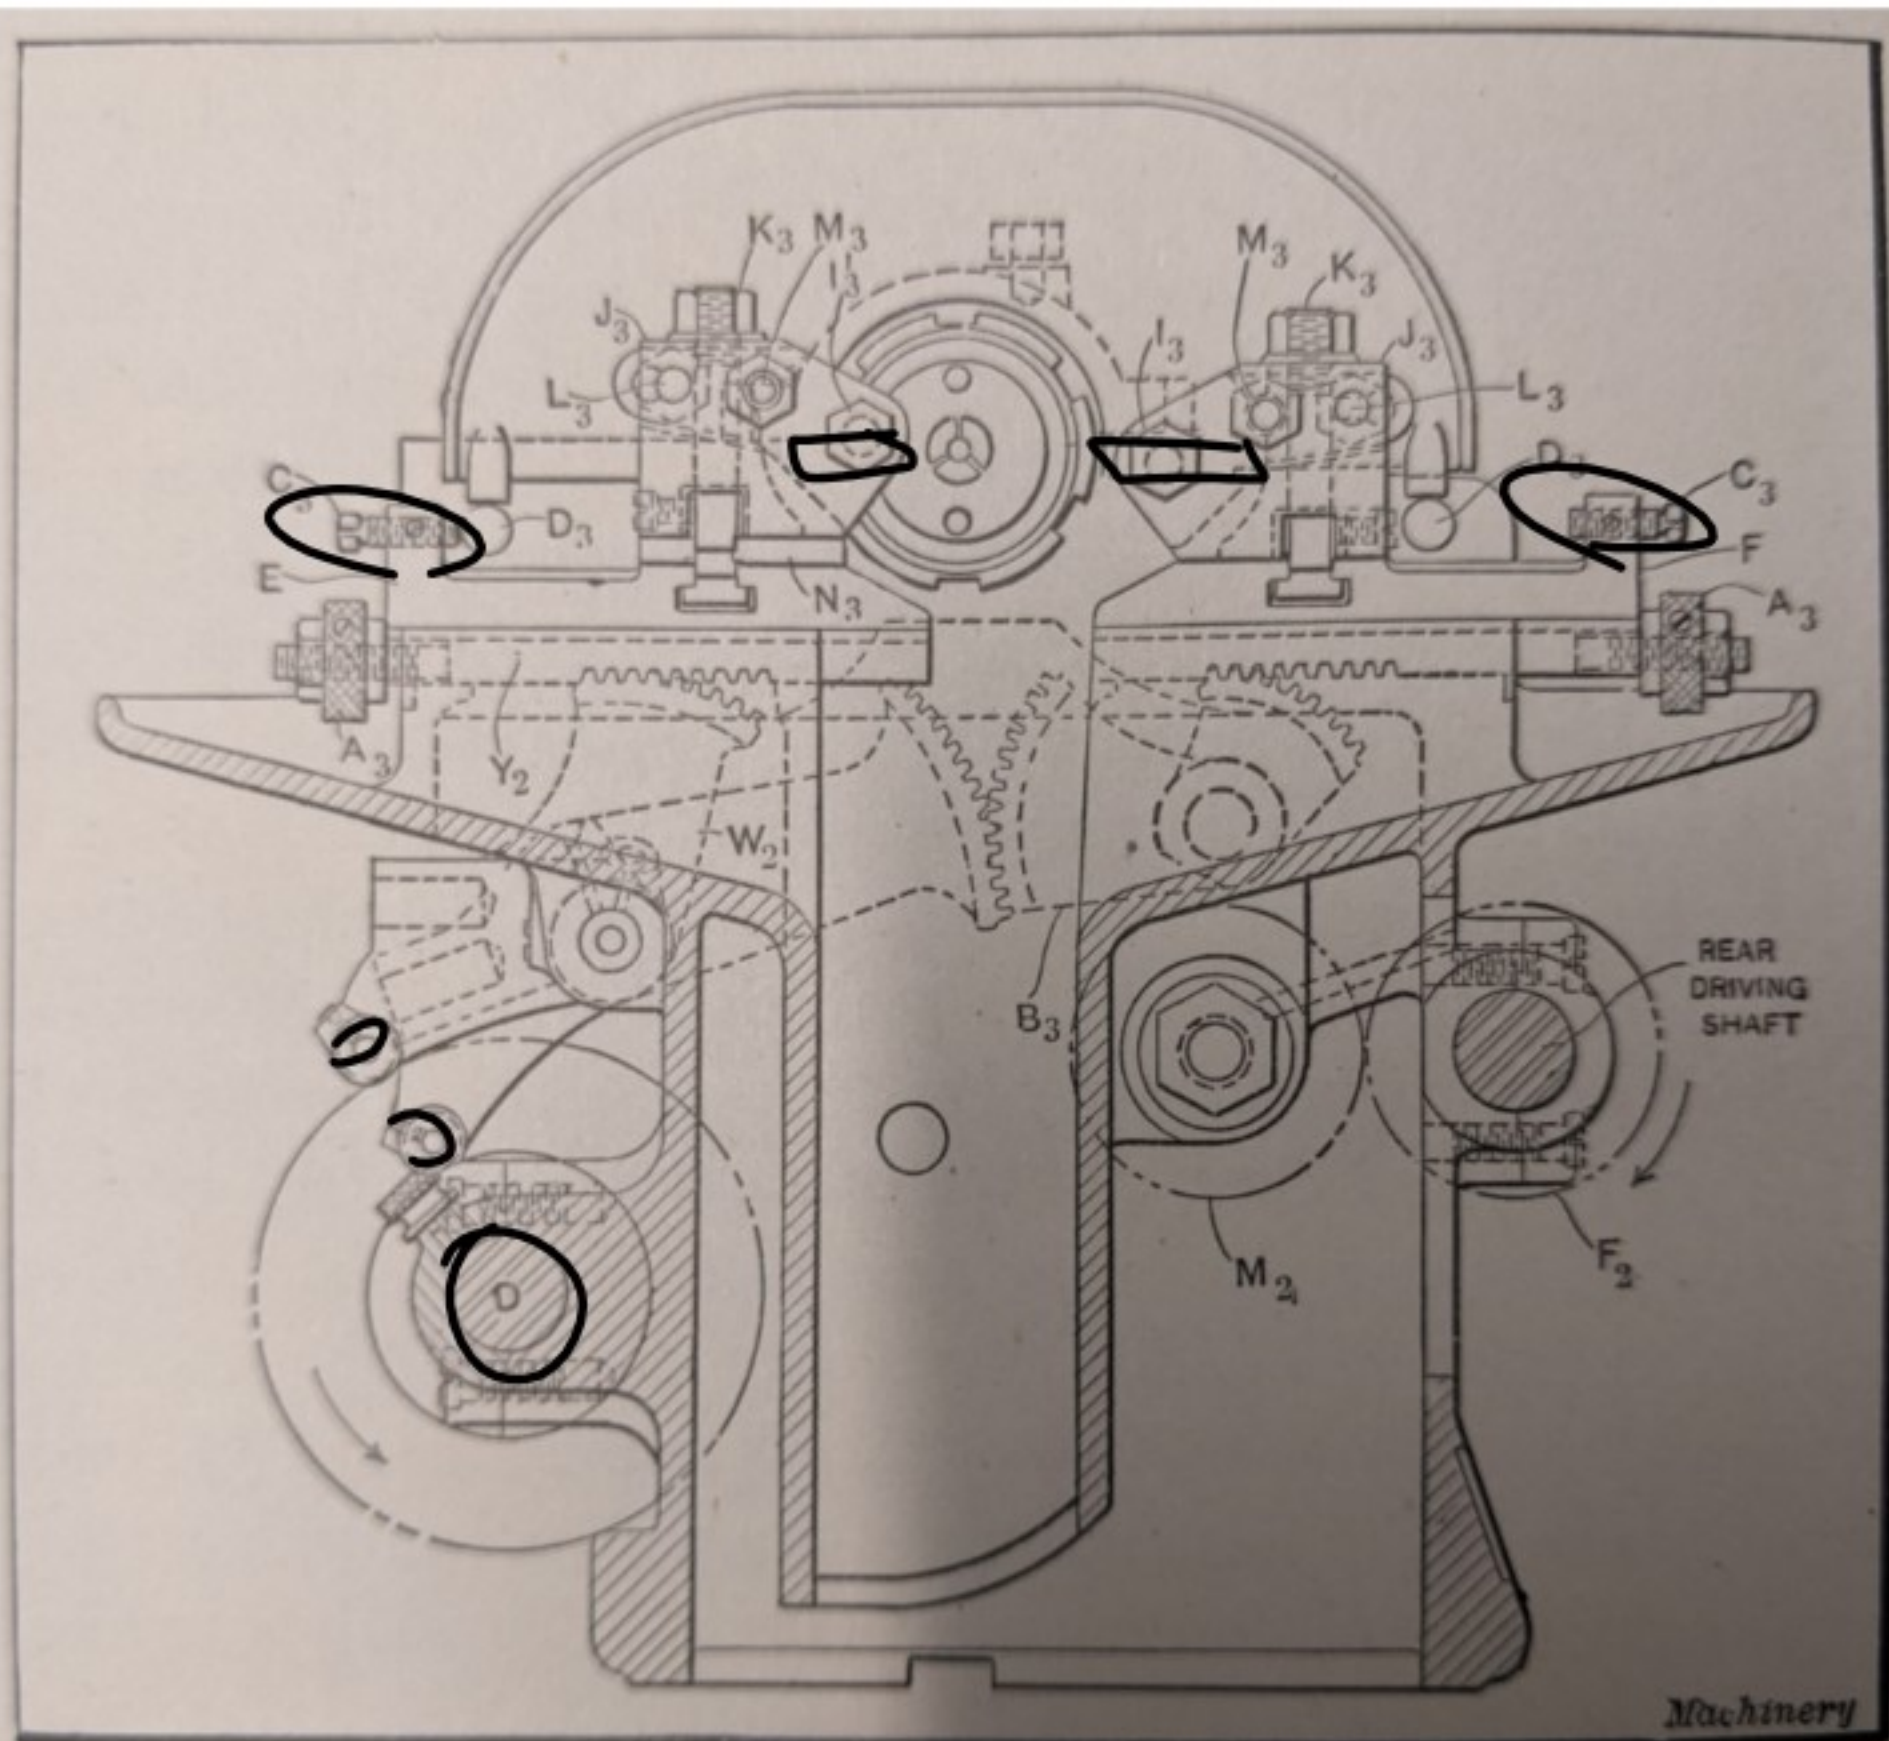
Partial Section of No. 60 Machine showing Mechanism for Operating Cross-slides
